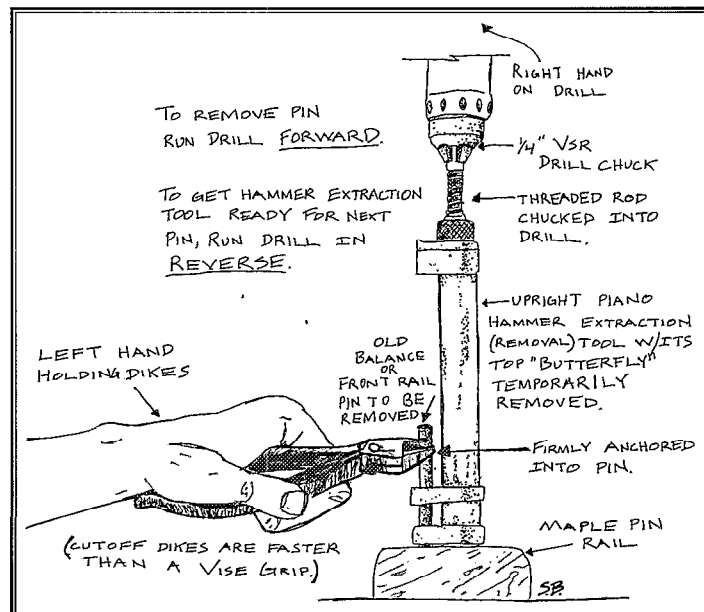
Setup for removing old key pins with modified hammer head extractor, electric drill, and dikes.
